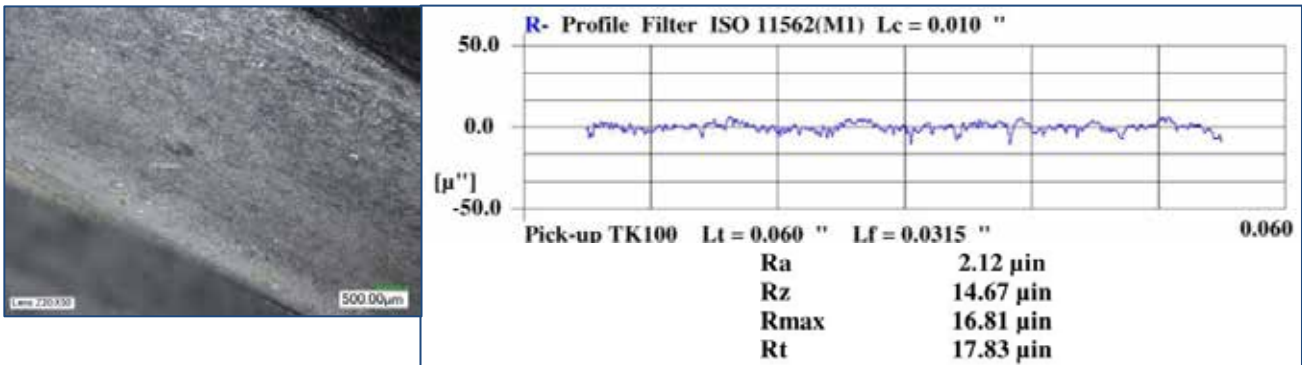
TEST CONDITION, Gear tooth image at 50x magnification and surface roughness measurement of ISF processed input pinion 7-211320021-9 SN 1074 used for LOL test.
